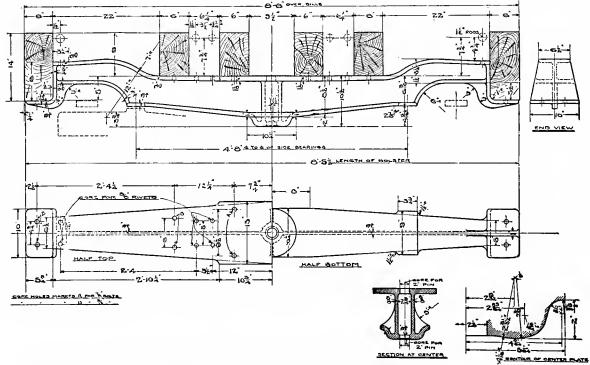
Cast Steel Body Bolster for Wooden Underframe Flat Car. American Steel Foundries.
